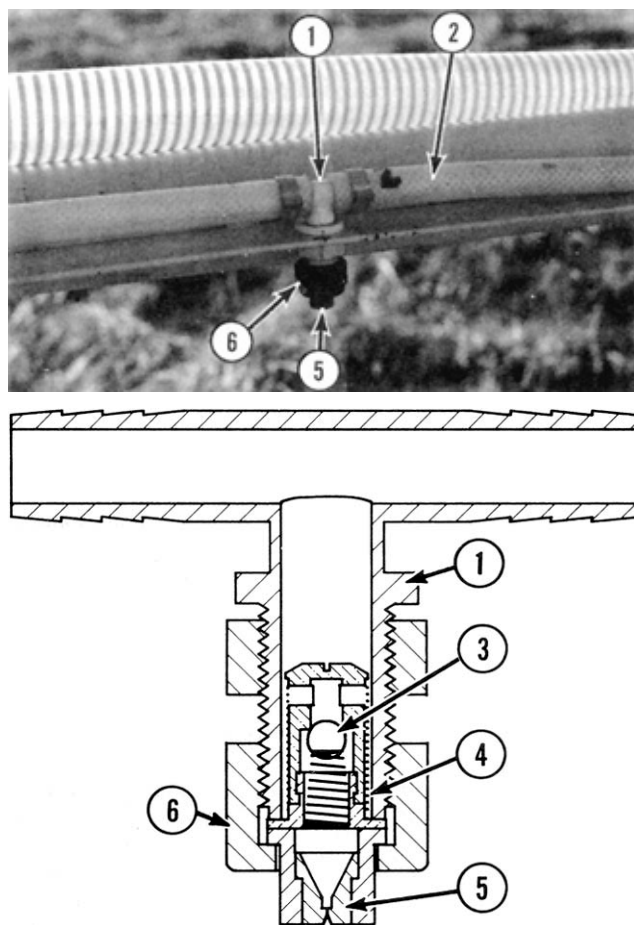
Hose Shank Nozzle Assembly: (1) Double Hose Connection (2) Spray Boom, (3) Check Valve, (4) Strainer, (5) Nozzle Tip, and (6) Threaded Nozzle Cap.
